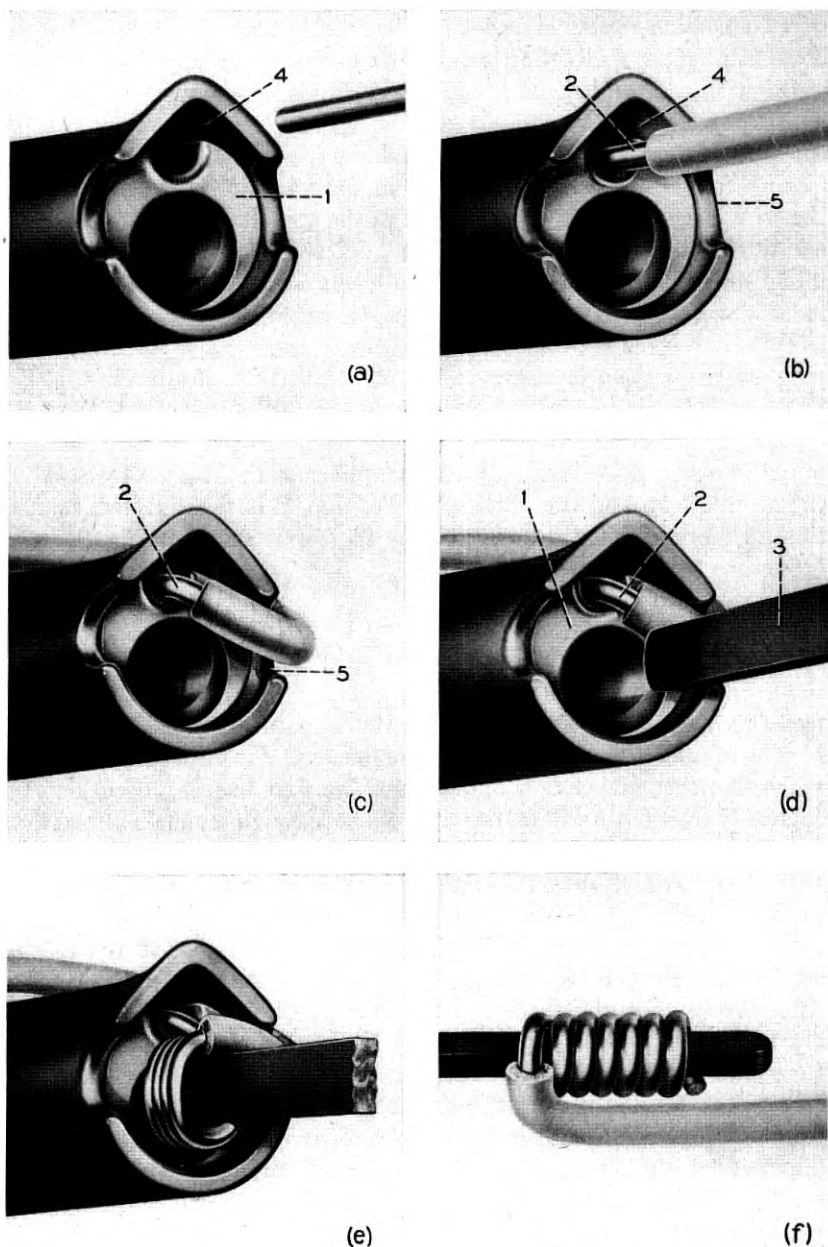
The wrapping process. A — Tool Tip. B — Wire Inserted. C — Wire Anchored. D — Terminal Insertion. E — Wire Wrapped. F — Finished Connection.
